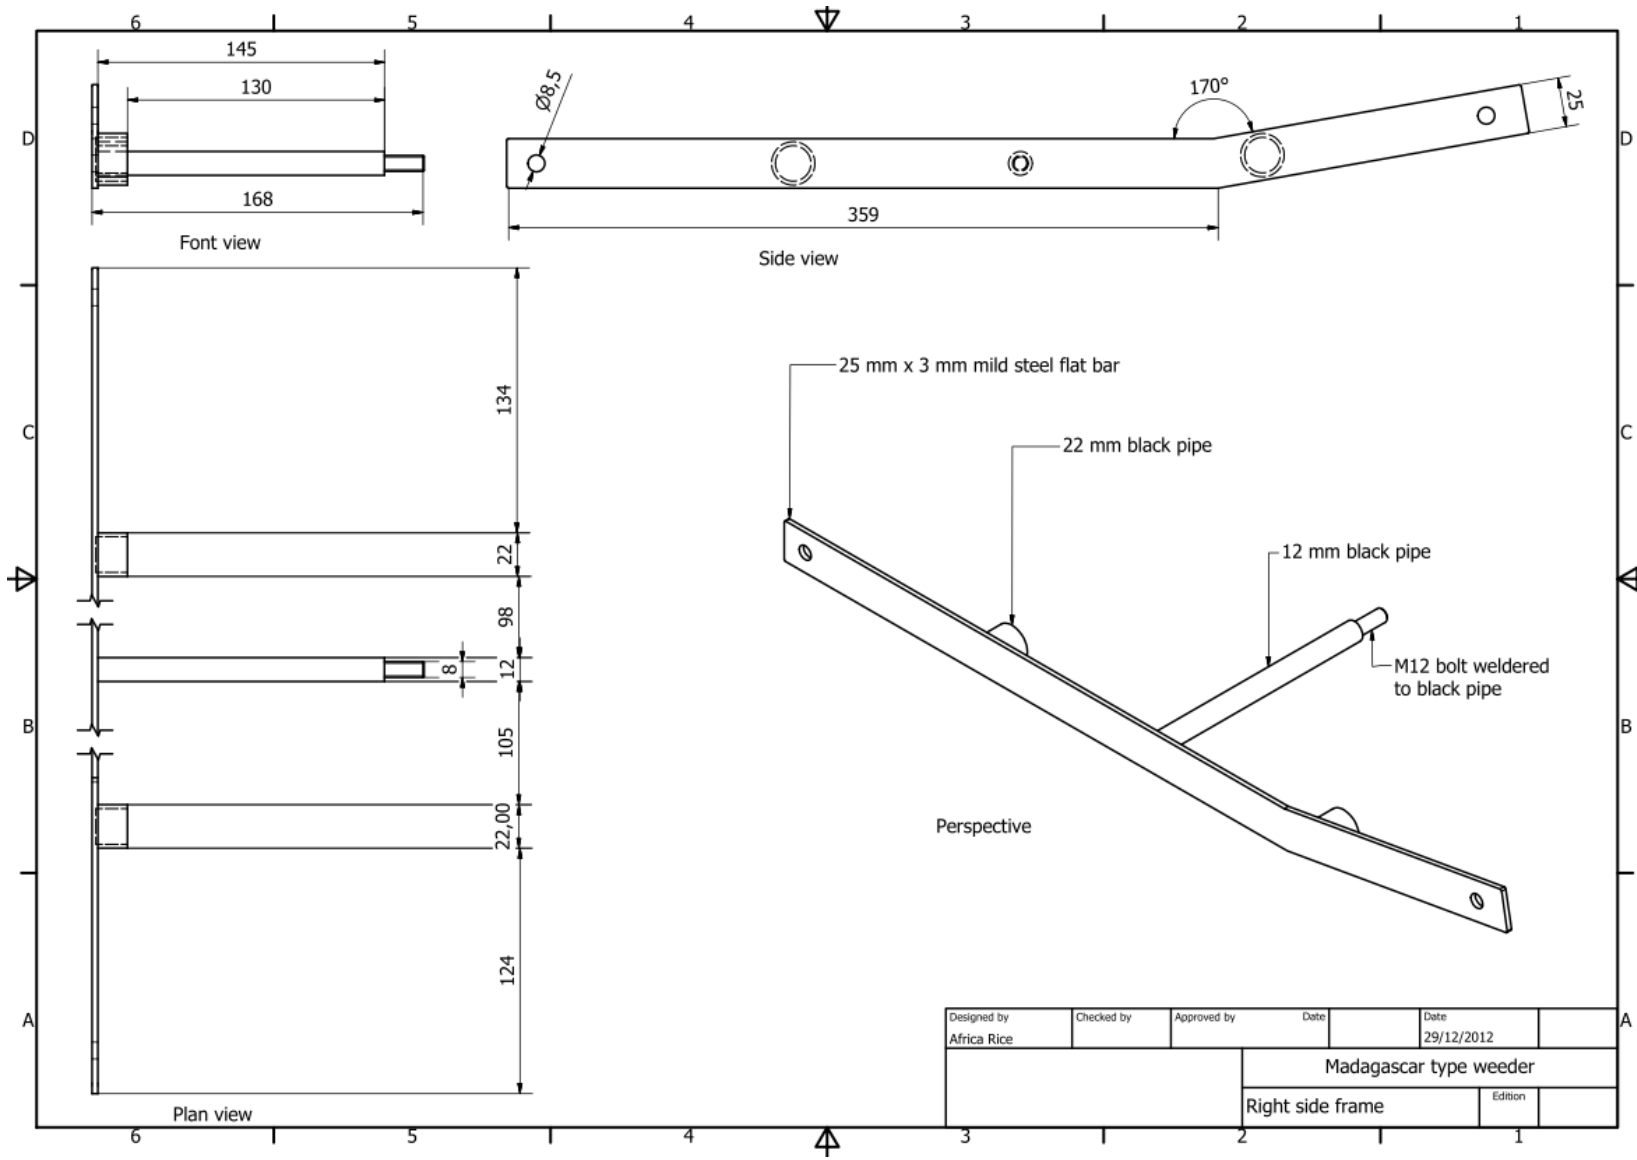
B: Technical drawing of the right side frame of Twisted-Spike Floating Weeder
